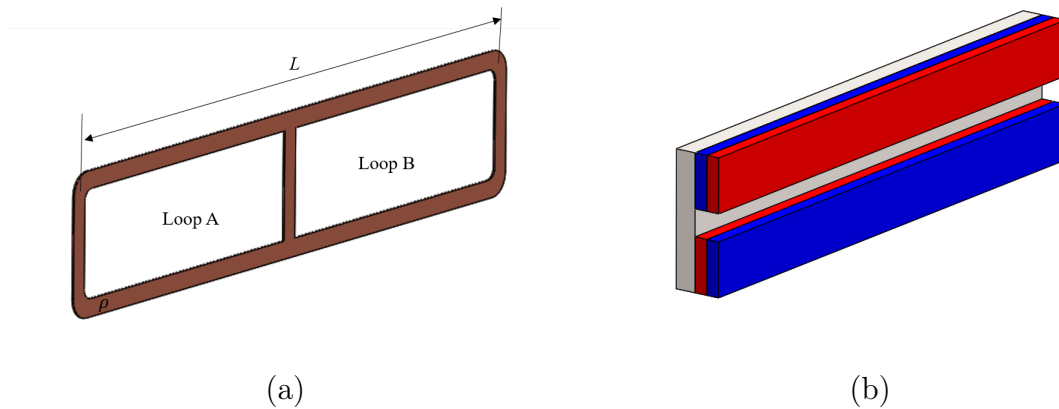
CAD model of parts in the suggested additional passive damper. (a) Figure-eight-shaped conductive loop. (b) Stator rail for passive damping.
